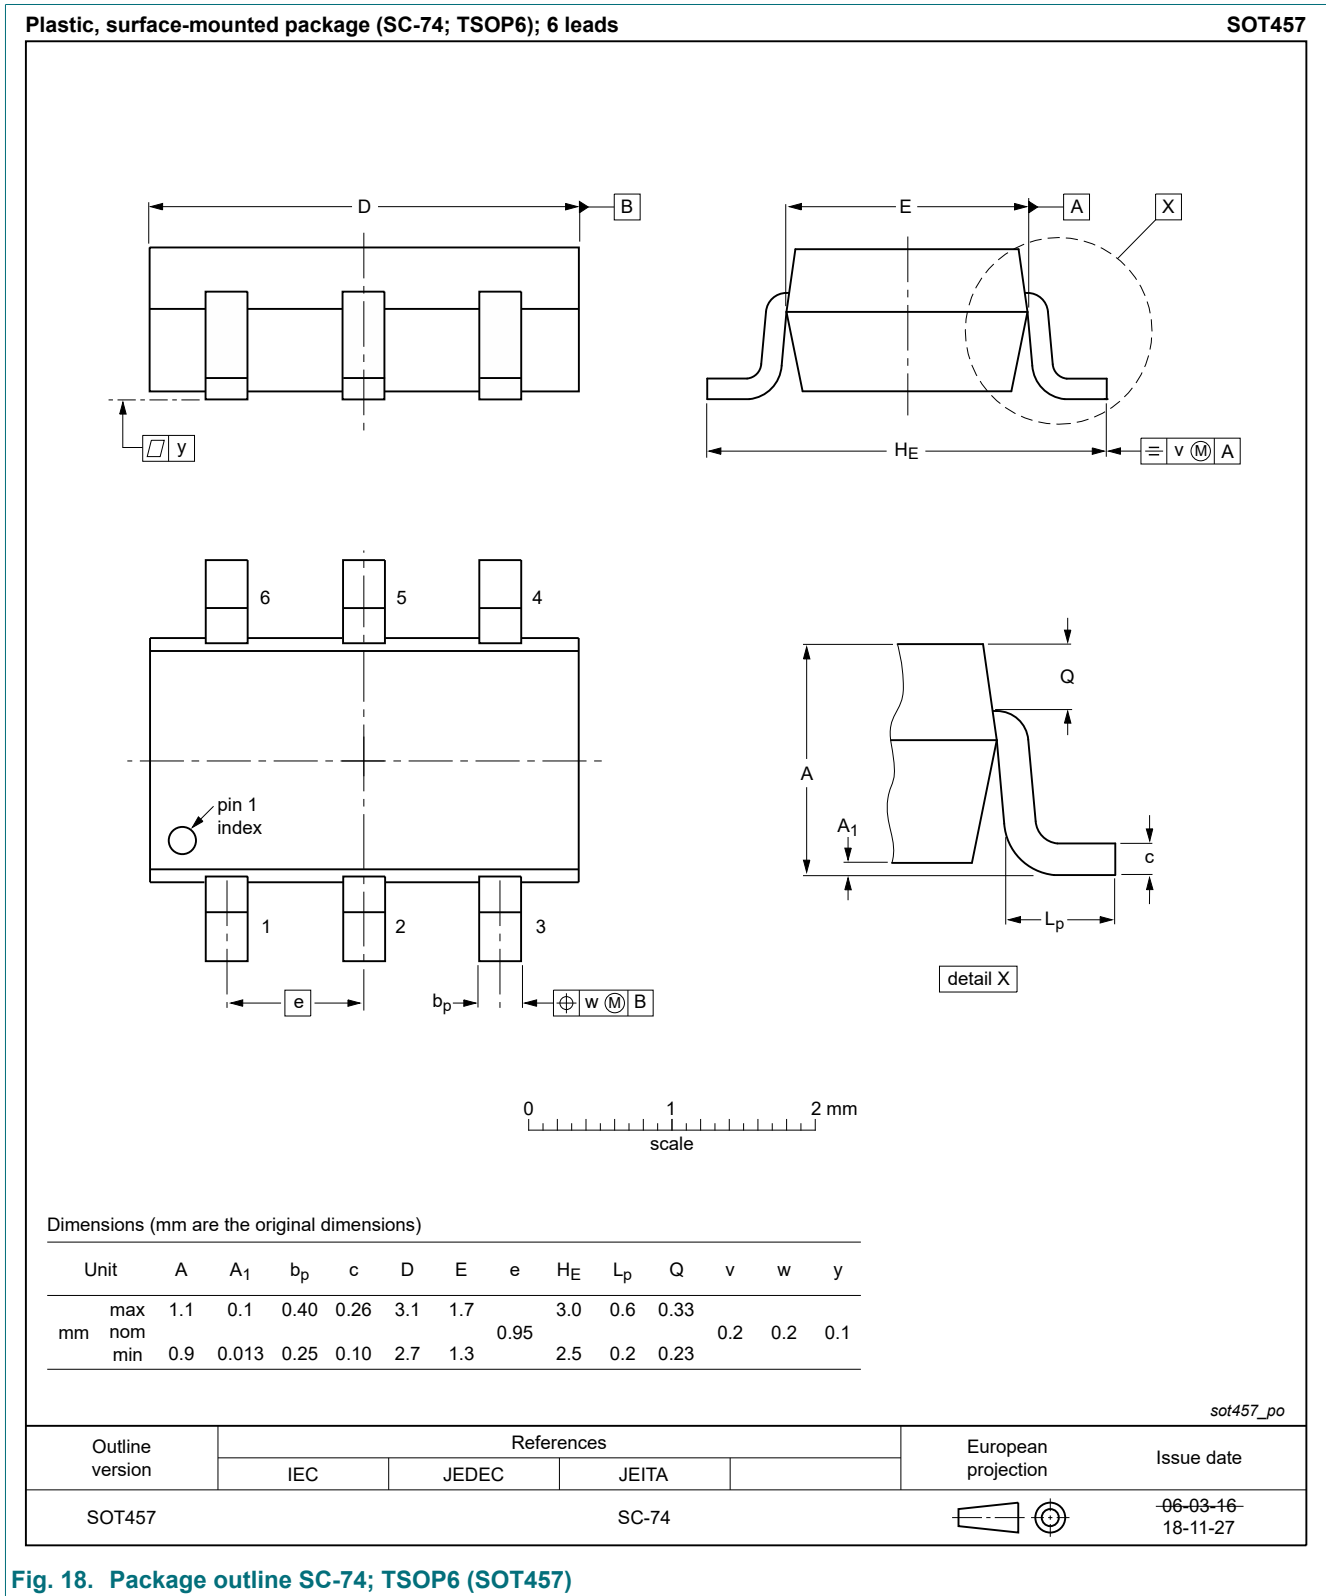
Package outline SC-74; TSOP6 (SOT457)
